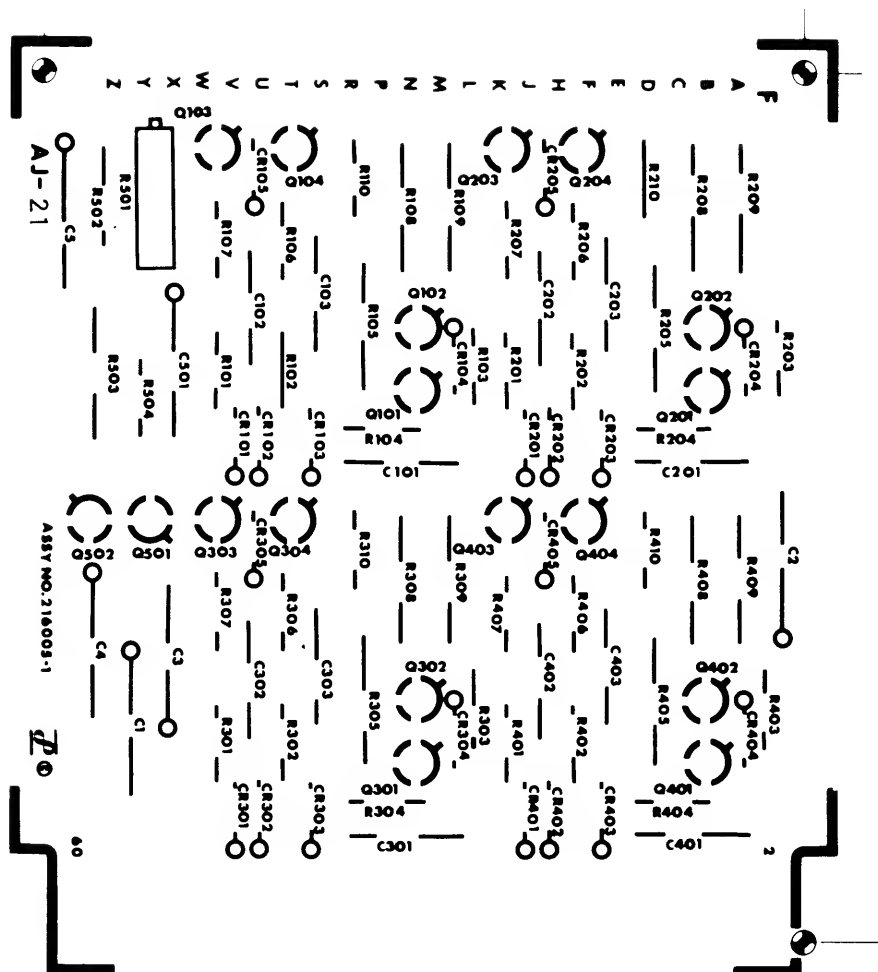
Driver, AJ21, Circuit Card Assembly
